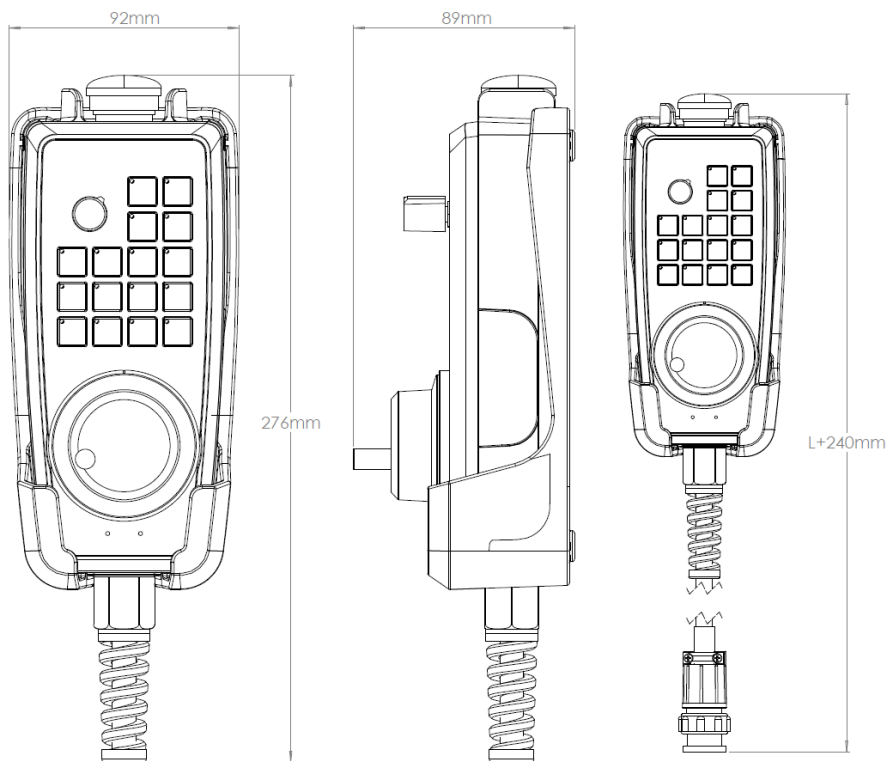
Remote Pendant Lite with Cradle Dimensions (mm)
